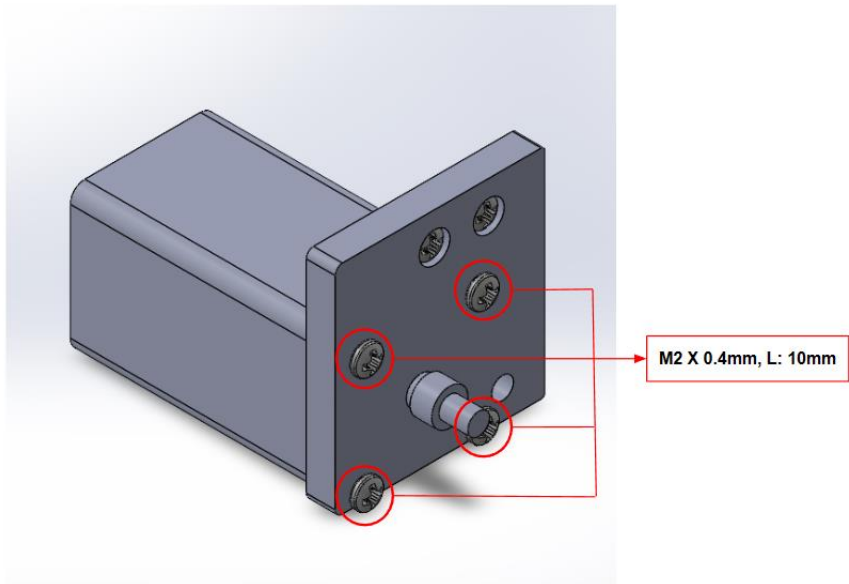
Screw fixation for the NEMA-8 stepper motor.
